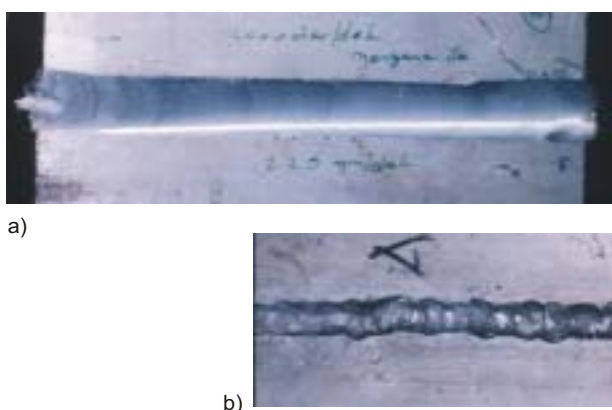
Surface macrograph of FSW (a) and MIG welds (b)
